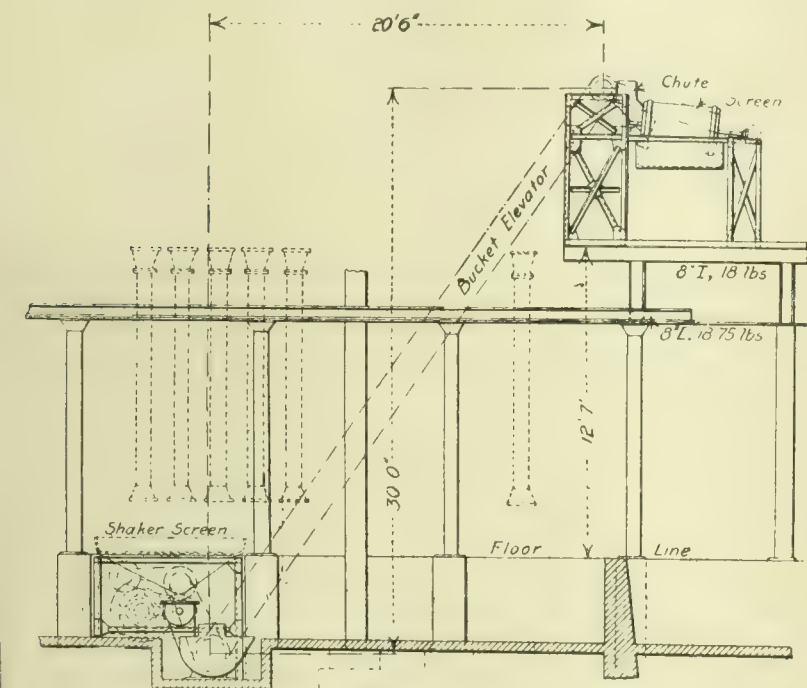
SECTIONAL ELEVATION ALONG CENTRE LINE OF ONE PIT, SHOWING SAND-TEMPERING AND MIXING PLANT AND ELEVATOR.
